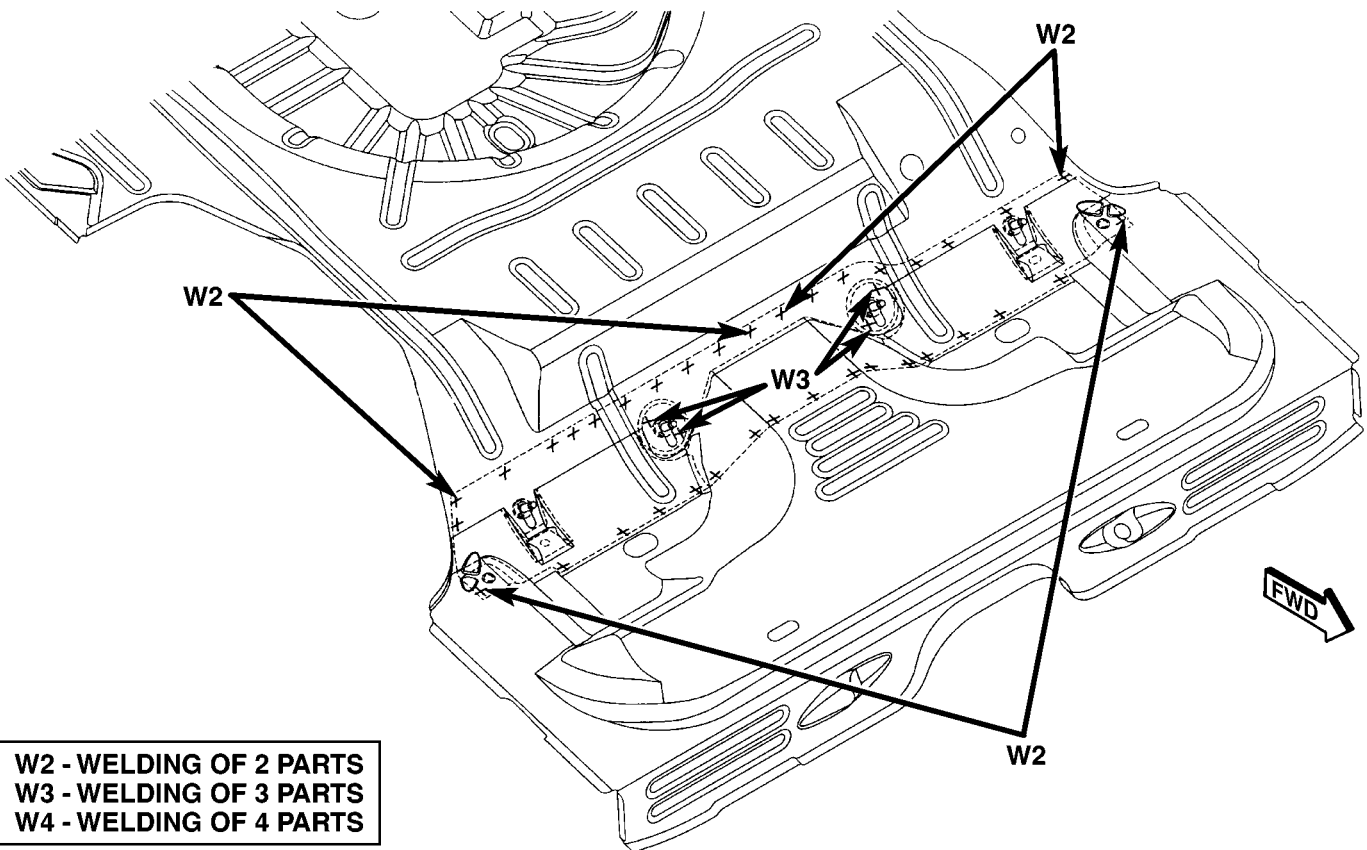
CENTER SEAT BELT REINFORCEMENT TO SEAT BELT ANCHOR TO REAR FLOOR PAN
